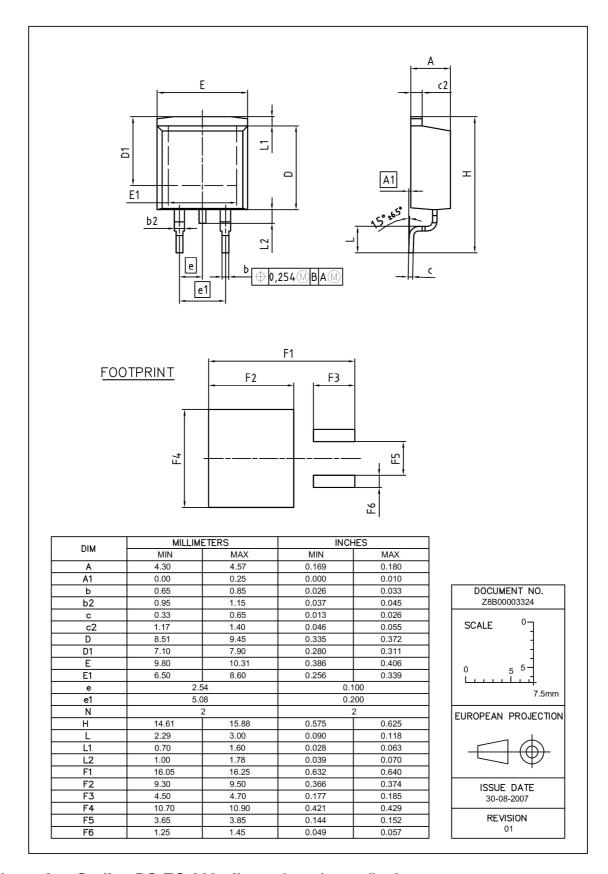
Outline PG-TO 263, dimensions in mm/inches
